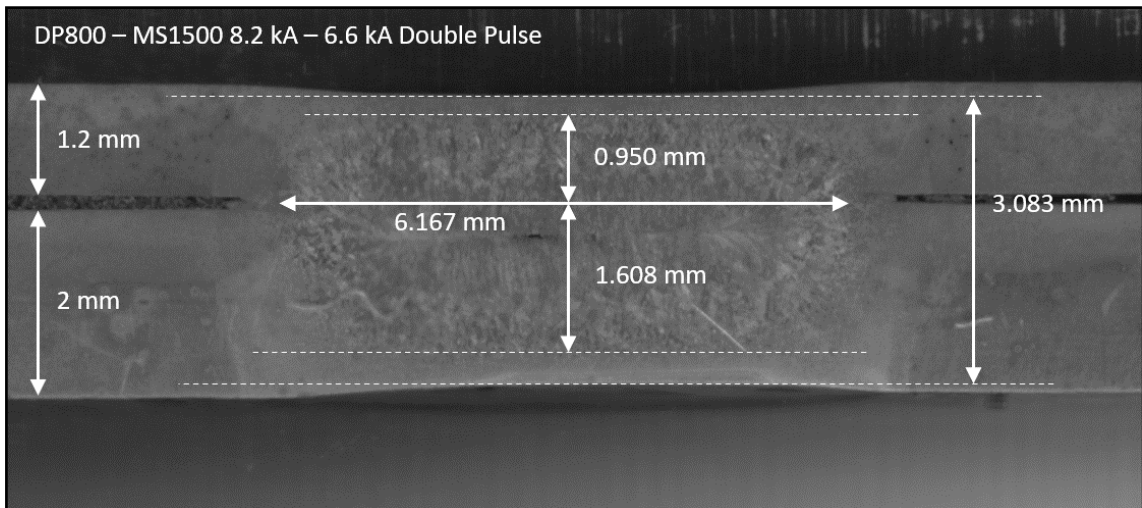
Weld nugget dimensions of DP800-MS1500 8.2 kA – 6.6 kA double pulse sample
